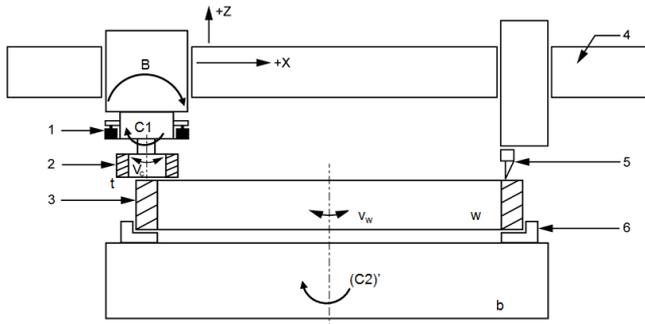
Rail grinding test rig set-up, representing the vertical turning machine and the grinding spindle. All axes from the tool (t) to the work piece (w) are schematically shown.
